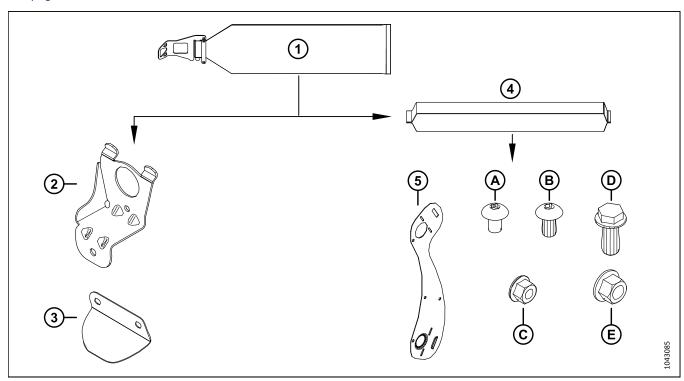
Six-Bat Reel Endshield Parts Bag MD #368323
